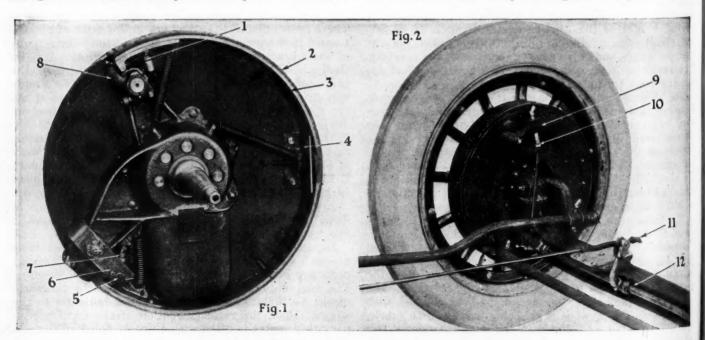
illustrates the right front brake with the drum removed. The brake band rests on three supports, 1, 4 and 7, being drawn inward against these supports by the tension of three springs. Each support is adjustable and can be used in regulating the clearance between the brake band and the drum. The lower end of the band assembly is connected through the link 6 to the brake carrier. The upper end of the band is acted on by the lever arm 8.
